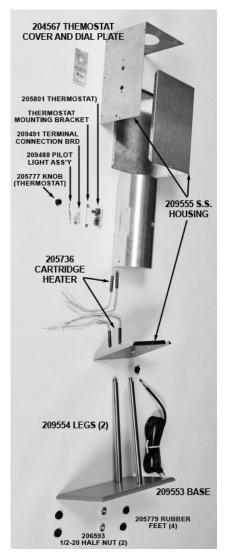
Heating Jacket Assembly, 500 ml, Exploded View
